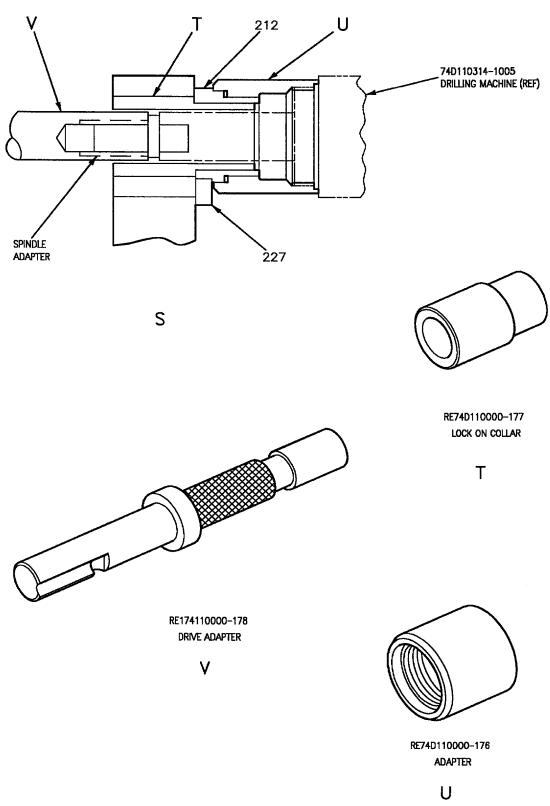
Setting Up to Machine I.D. of Bushing or Lug at Location 1, Y453.000 (Sheet 6)
